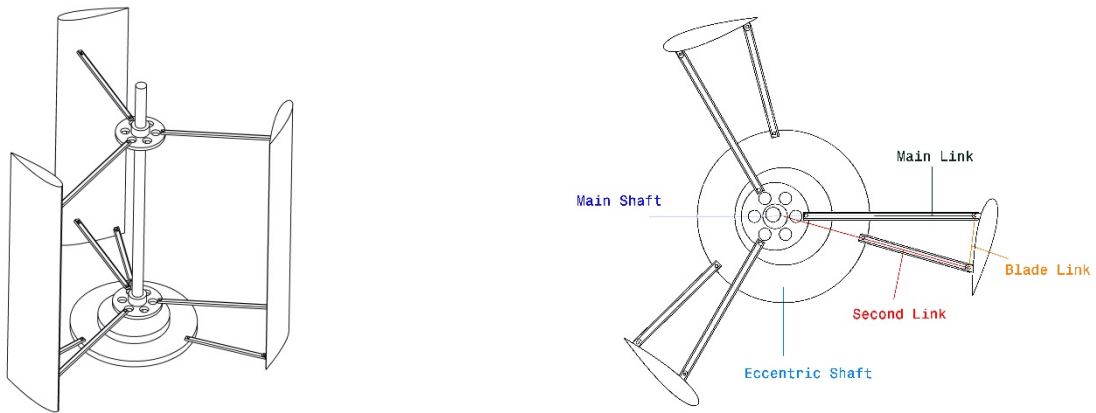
A 3-D overview of the modeled wind turbine a) Isometric view of the rotor b) Top view of the rotor
